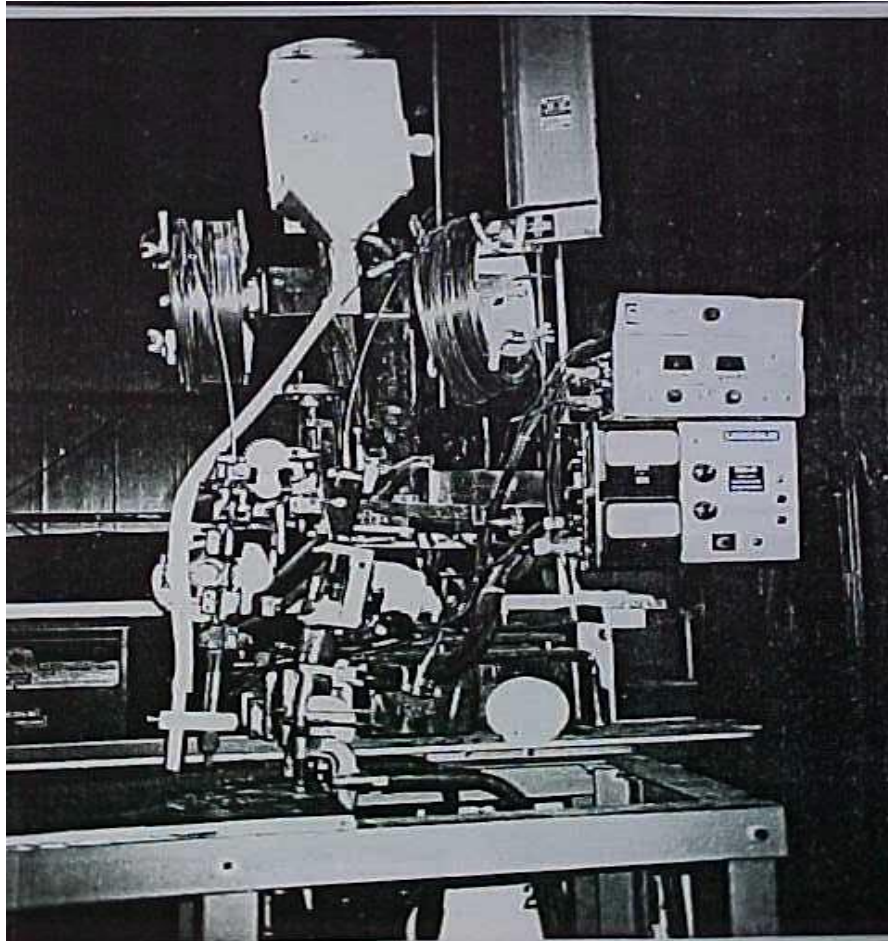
TANDEM ARC WELDING TRACTOR
